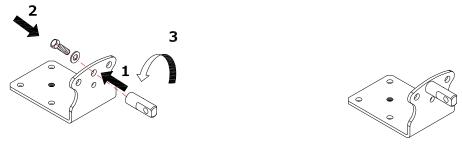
Assembly of the LVB/LVBD device with a turnbuckle support (Cod. 000194)
